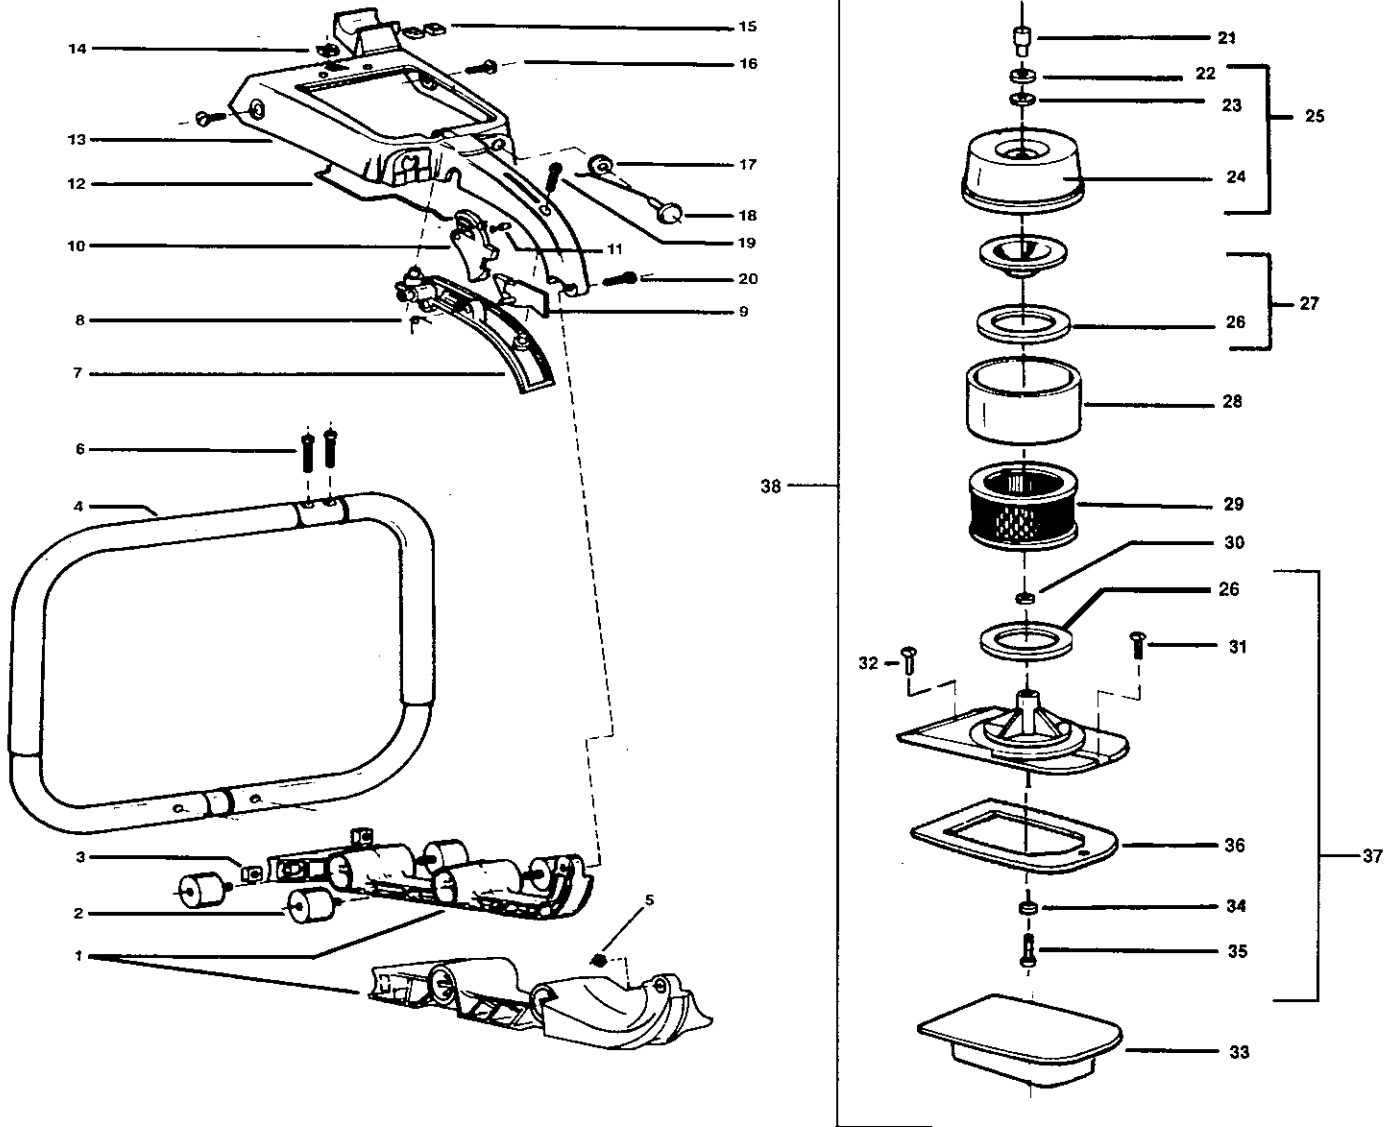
FIGURE II - PARTS LIST HANDLE, FRAME AND AIR FILTER
